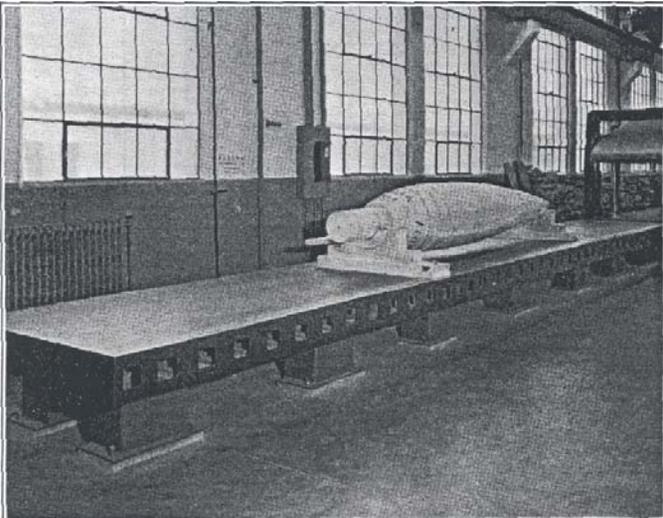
LARGE LAYOUT TABLE, 32, FEET LONG.
